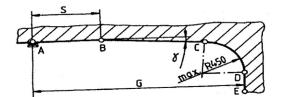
Degrees of freedom and dimensions imposed to assembly made of tractor motor vehicle with saddle and semi-trailer
